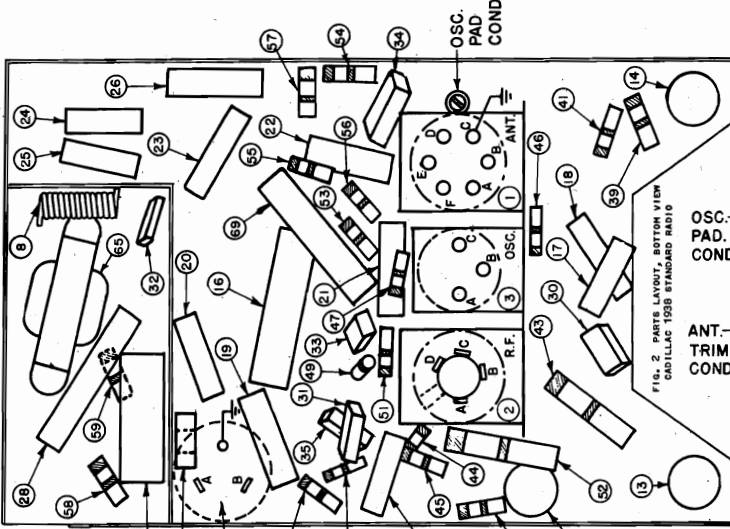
PARTS LAYOUT, BOTTOM VIEW CADILLAC 1938 STANDARD RADIO
